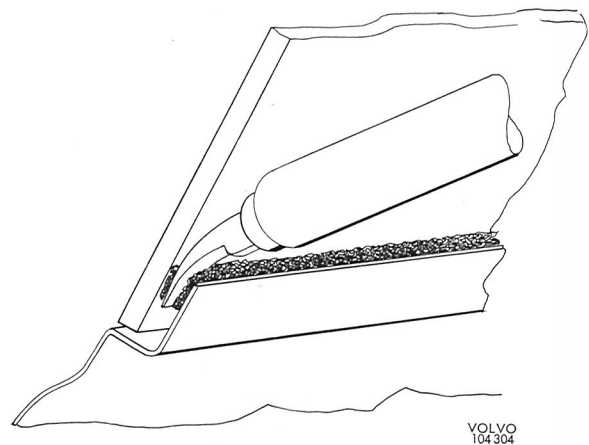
The soldering iron should be on 200 W. The tip may not be so thick that it can come in contact with the glass.
